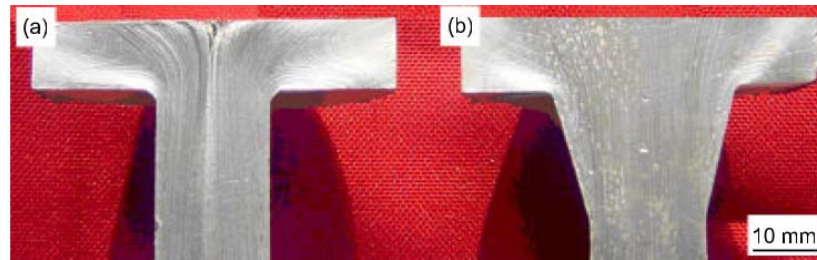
Flow lines of an extruded solid bar through a pocket die (a) without guiding angle & (b) with a guiding angle (reproduced from [14]).
